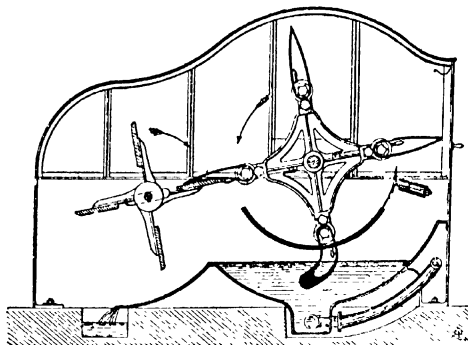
Washing and Striking Machine for Silk Skeins.
